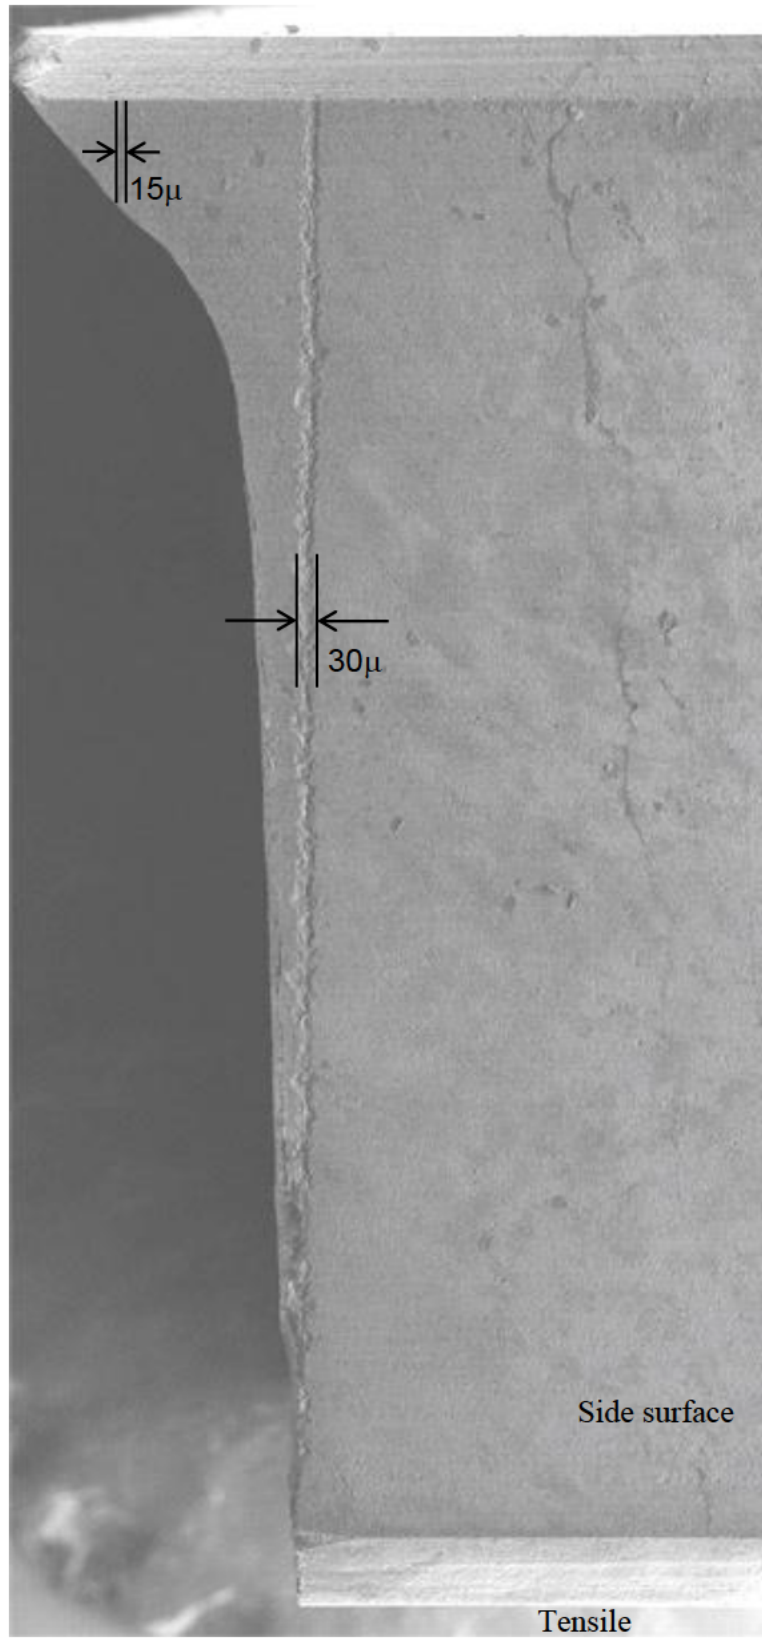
Errant machining scratch; tensile surface of low-strength bend bar (B)
